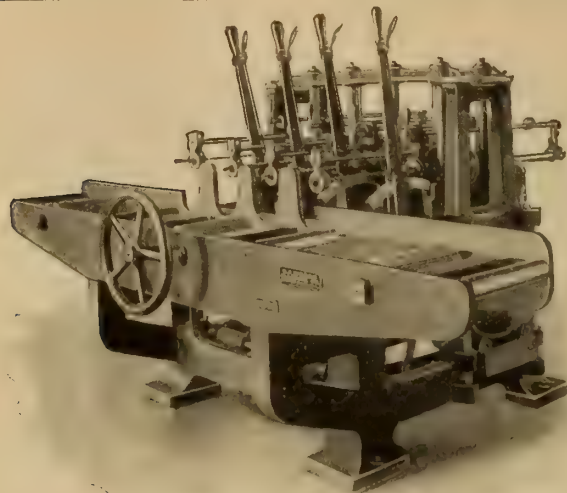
1 SPINDLE HORIZONTAL BORING MACHINE. No. 325.
